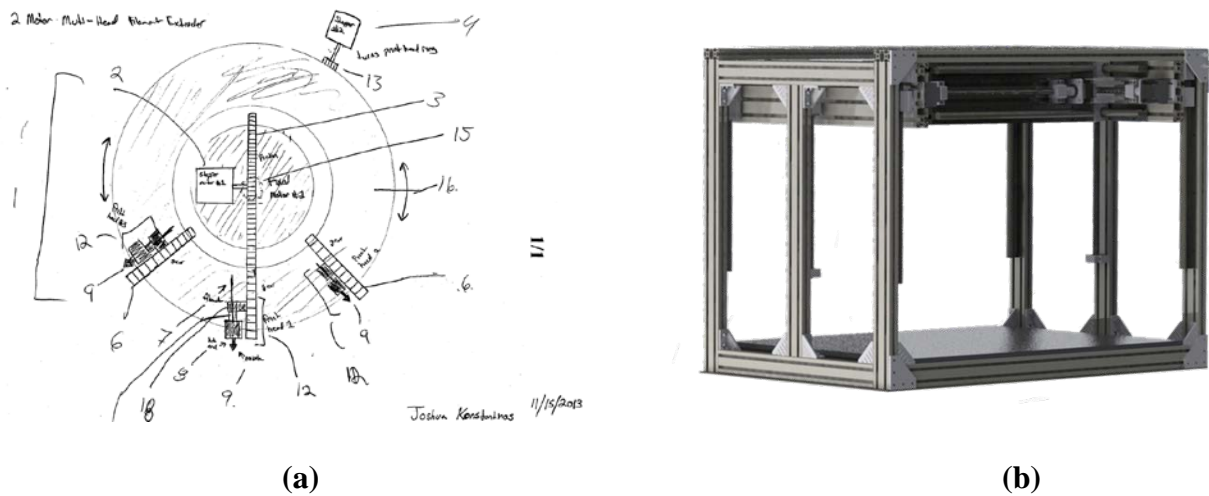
(a) Two-Motor Multi-Head Print Head Assembly (US Patent No. 61/904,868, 2013 - Patent Pending) (b) SolidWorks® Photo Realistic Model of Dragon 3D Printer Frame
